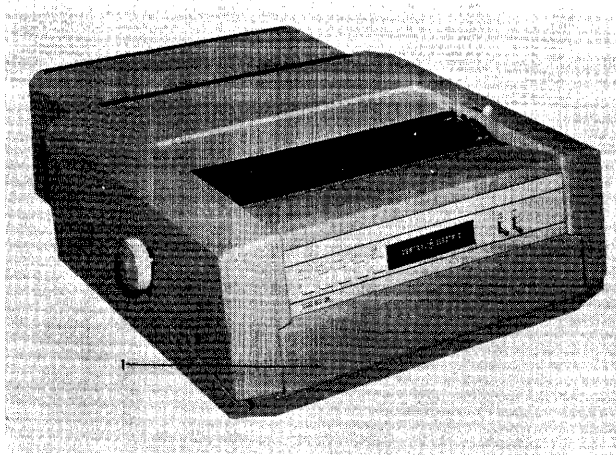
Top-Bottom Cover Assembly TerminiNet 300 Printer
